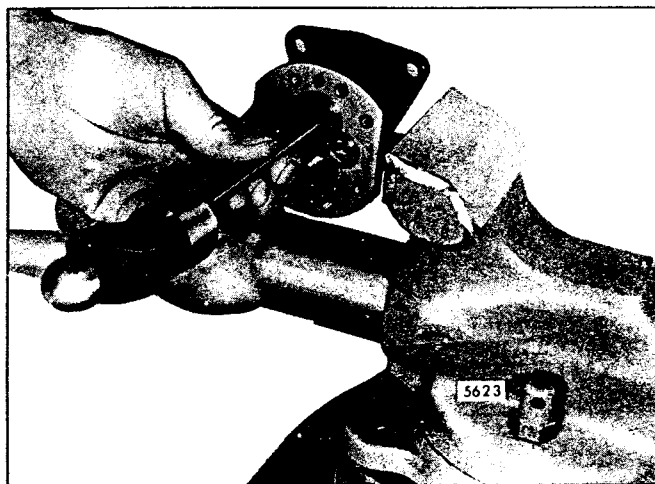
Removing Oil Seals Using Tool J 1508-13
